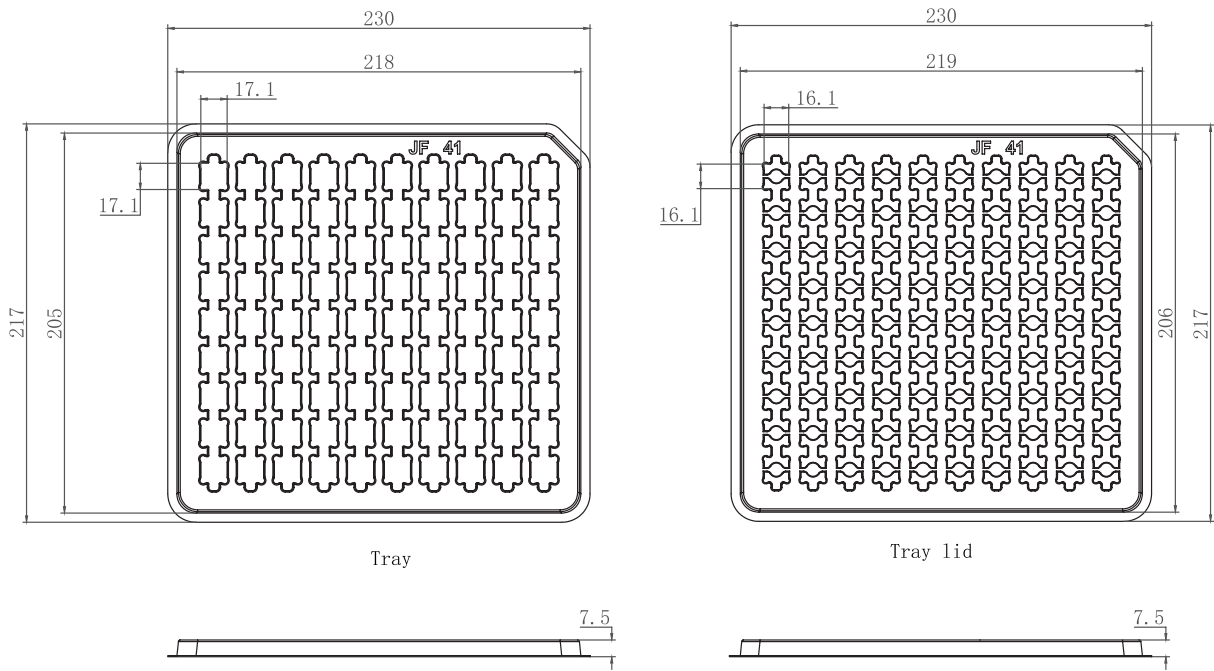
Tray dimensions for L2C4-xxxxxS01F0600.
